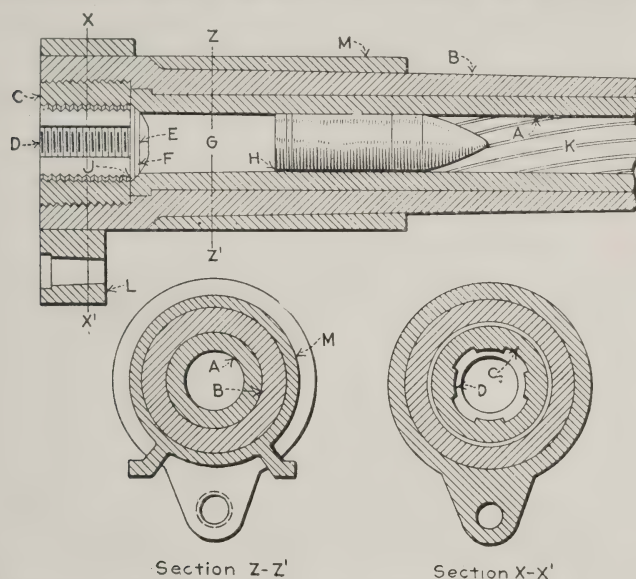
Longitudinal and Cross Sections of a Built-Up Gun
